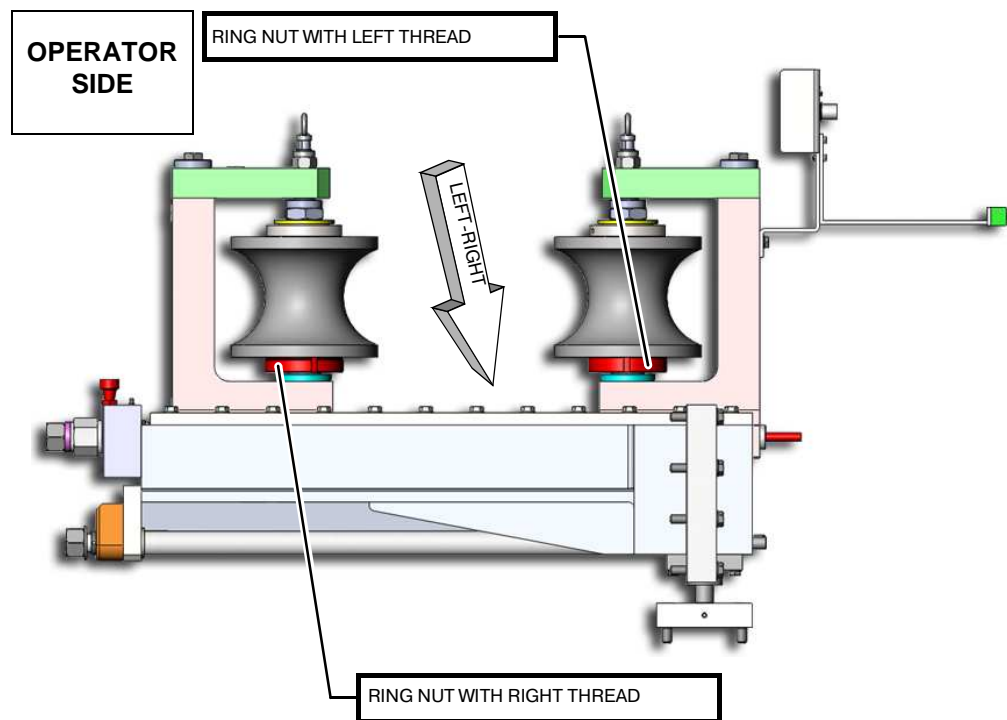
L Assembly scheme of roll locking ring nuts according to line work direction
